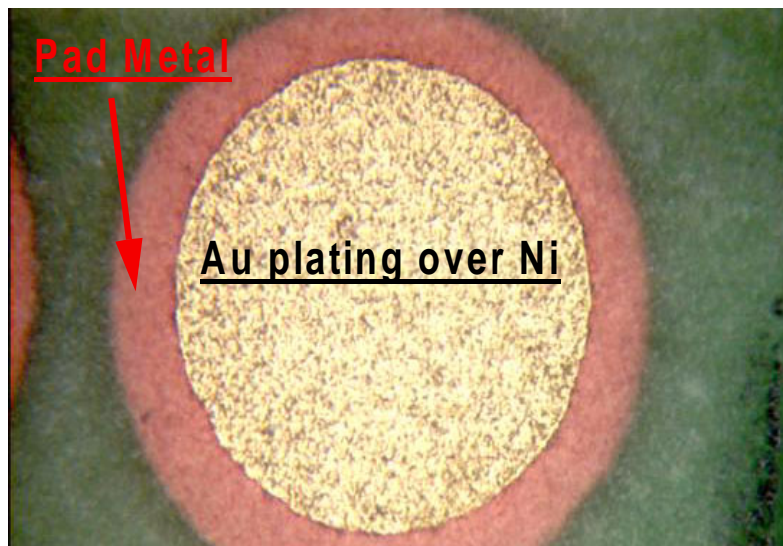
Typical Solder Mask Defined (SMD) LGA Pad
